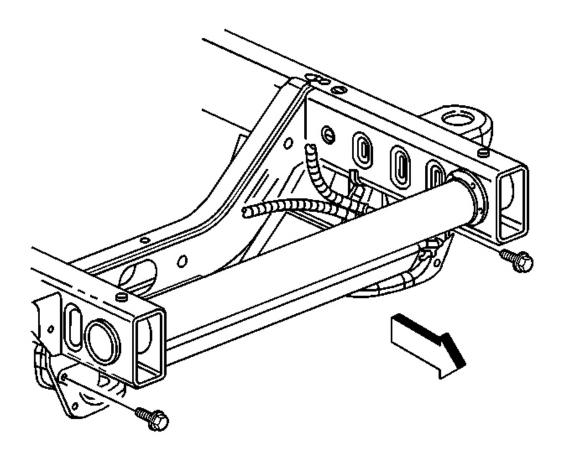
Removing/Installing Power Steering Cooler Mounting Bolts Courtesy of GENERAL MOTORS CORP.
